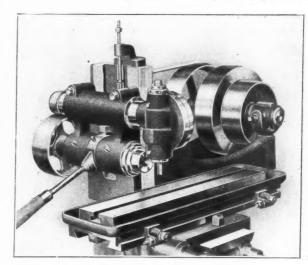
Vertical Attachment for Whitney Hand Milling Machine
